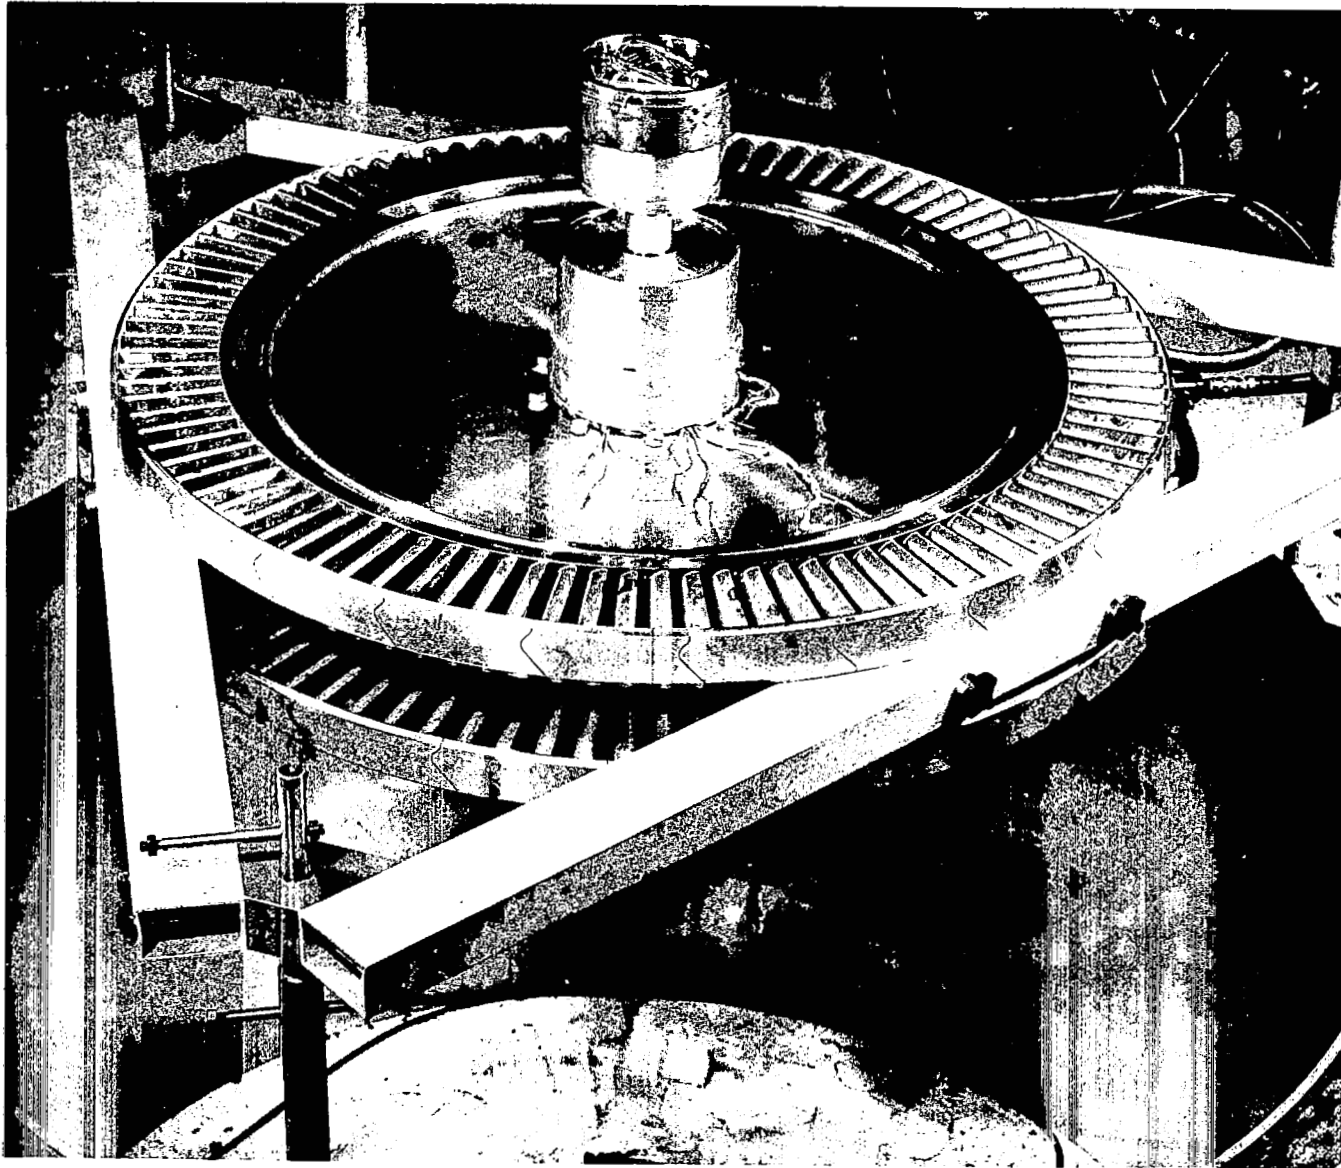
TEST ROTOR SUPPORTED IN HANDLING RIG
